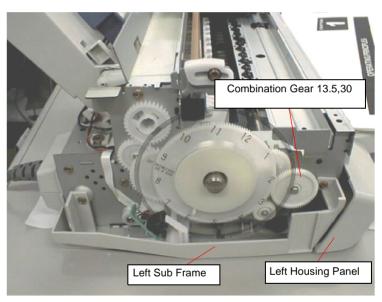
Combination Gear 13.5, 30 & PF Encorder Sensor
